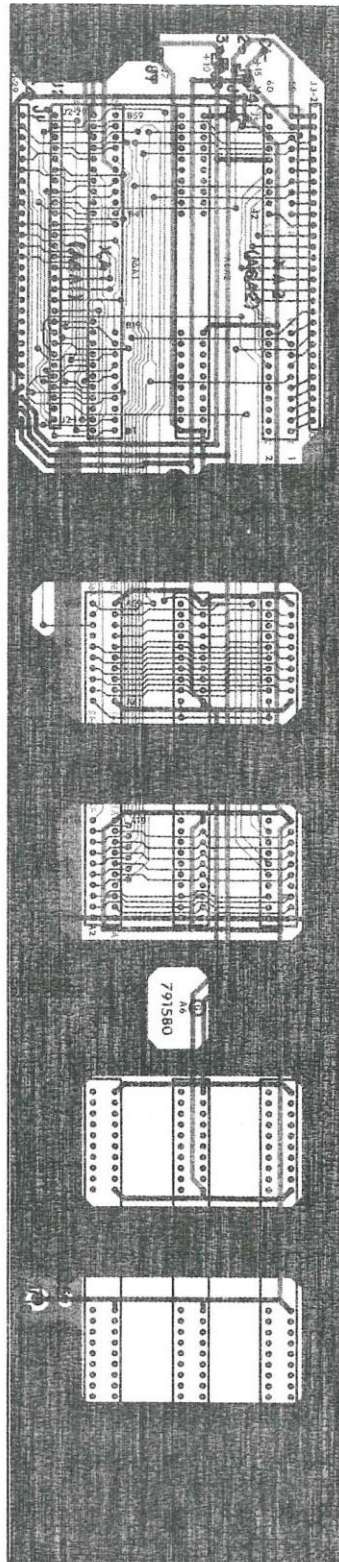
Tracks in the later versions of the A6 motherboard PCB (top side)
